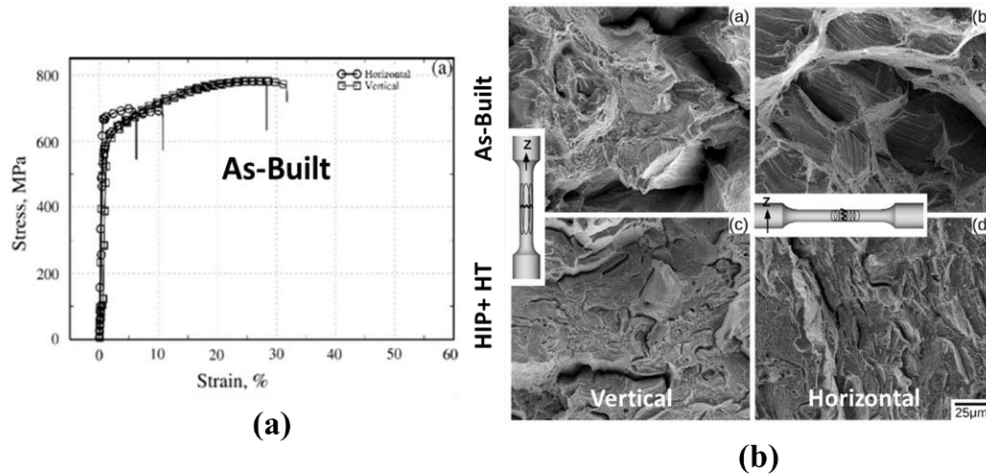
Fracture surface of HX samples in different conditions [17]
